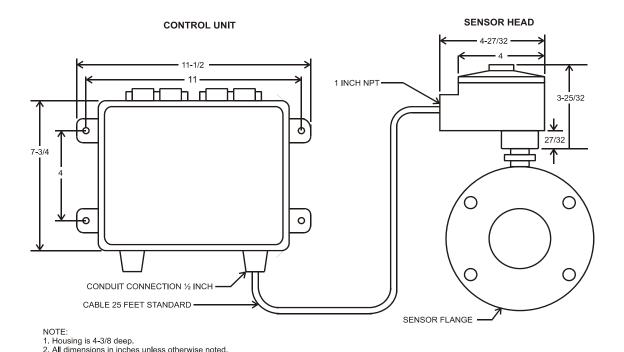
L3545 with Sensor Flange: Dimensional Drawing
